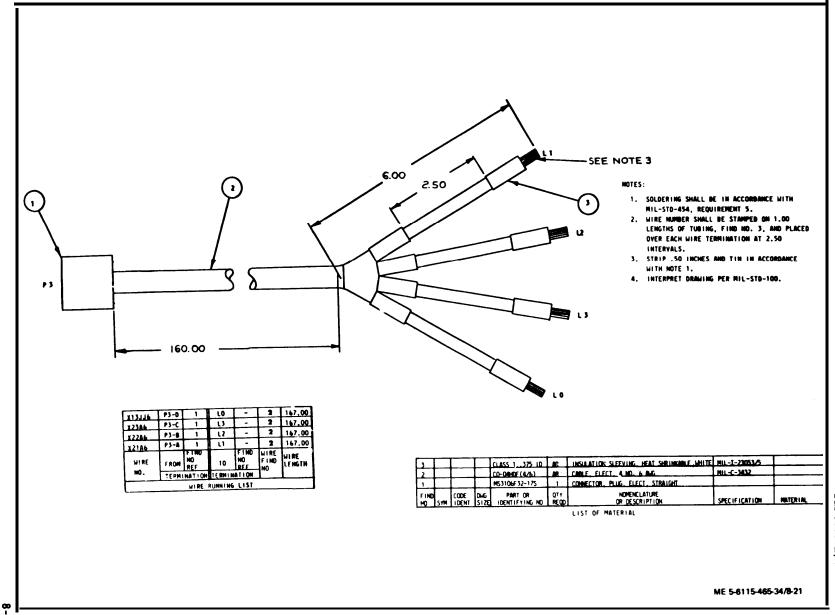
Load Bank Power Wiring Harness, Drawing No. 72-2829
